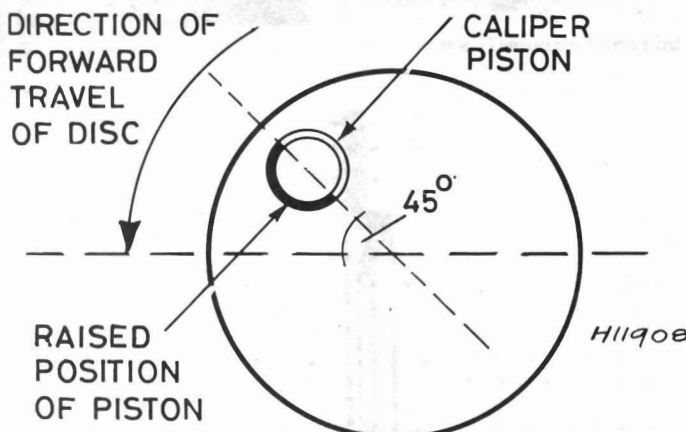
Caliper piston step setting diagram (Sec 5)
